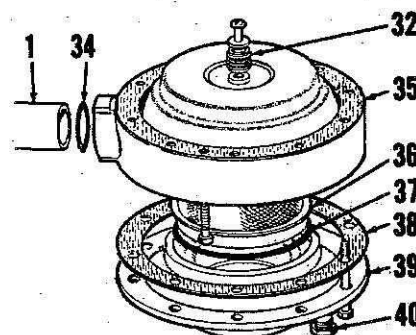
Exploded view of pump suction screen, housing and cover for model 1200 with dual pump and early model 1200 with single pump. On late model 1200 with single pump, a full flow element similar to that shown in Fig. 176 is incorporated into the assembly.
